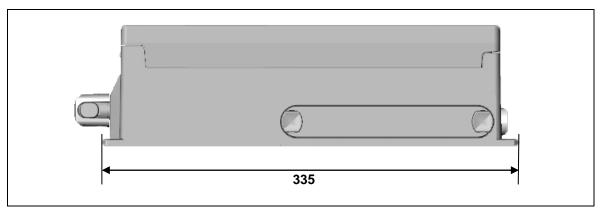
Dimensions of the SG(AG) 300 control unit, front view (in mm)
